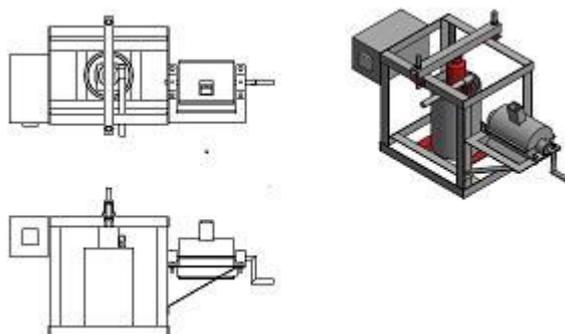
Drawing showing an extracting machine for small-scale production of local pomade from coconut
